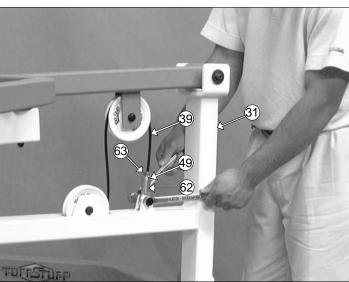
Insert a Split Lock Washer Z/P 1/2" (#49) to the Cable Hex Bolt 1/2-20 X 1 (#63) then thread the Rod End 1/2-20 (#62) to the Cable Hex Bolt 1/2-20 X 1 (#63). Next, affix the Rod End 1/2-20 (#62) to the Shoulder Press Main Frame (#31) using one Hex Head Cap Screw 1/2-13 X 1 1/2 (#55), and one Nylon Insert Jam Lock Nut 1/2-13 (#64).
